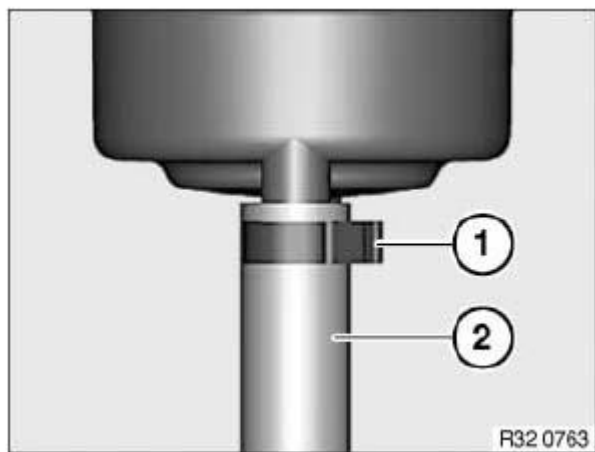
Identifying Hose Clamp And Cooler Return Line
